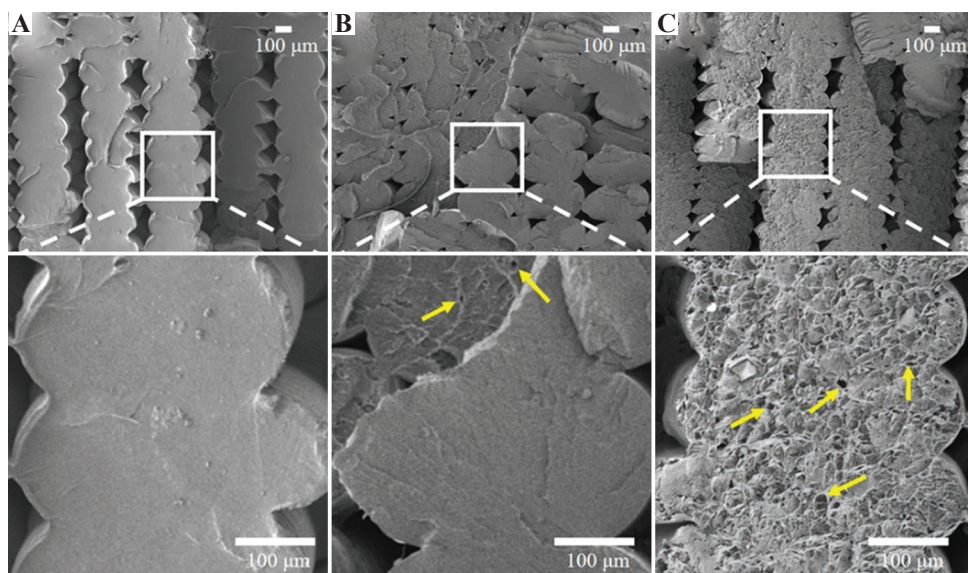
Morphologies of the specimens' fracture surfaces. (A) Scheme 2. (B) Scheme 6. (C) Scheme 7.
